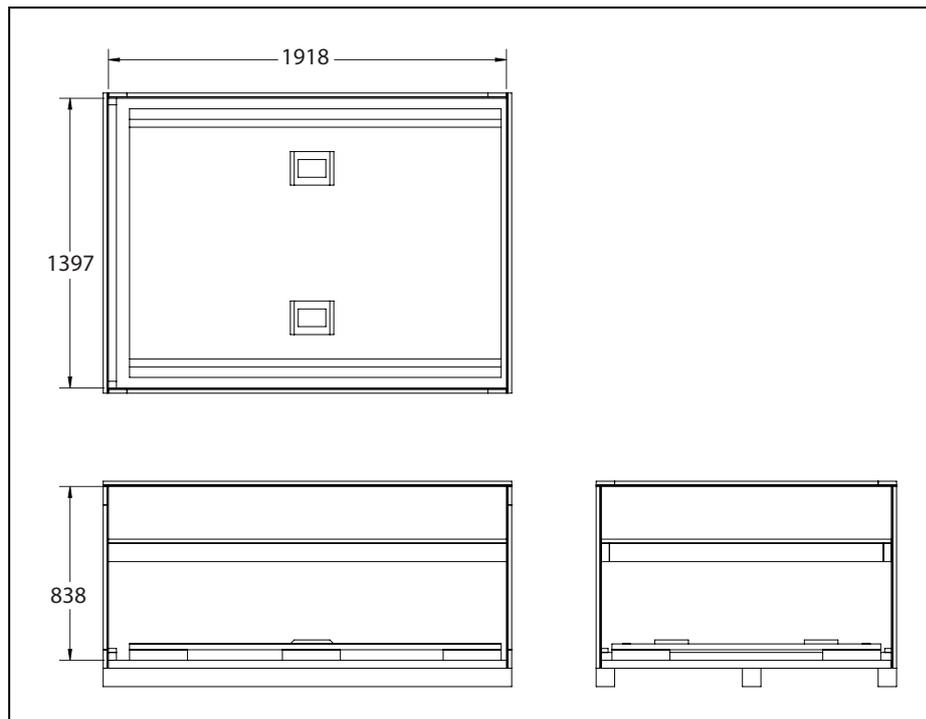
HD-1500 Shipping Crate Inner Dimensions
